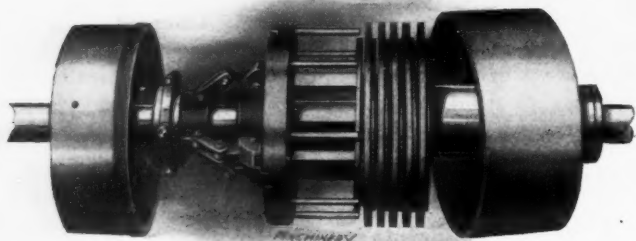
Moore & White 21-inch High-speed Friction Clutch Pulley partially disassembled
